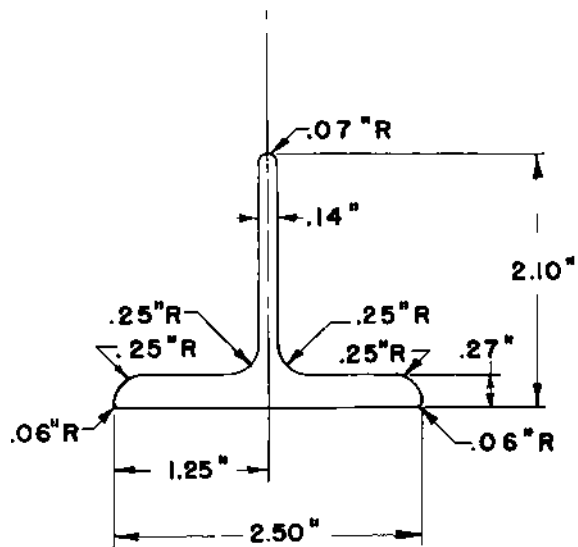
(SHEET 1 of 2 SHEETS) — WING SPAR CAPSTRIP EXTRUSIONS
